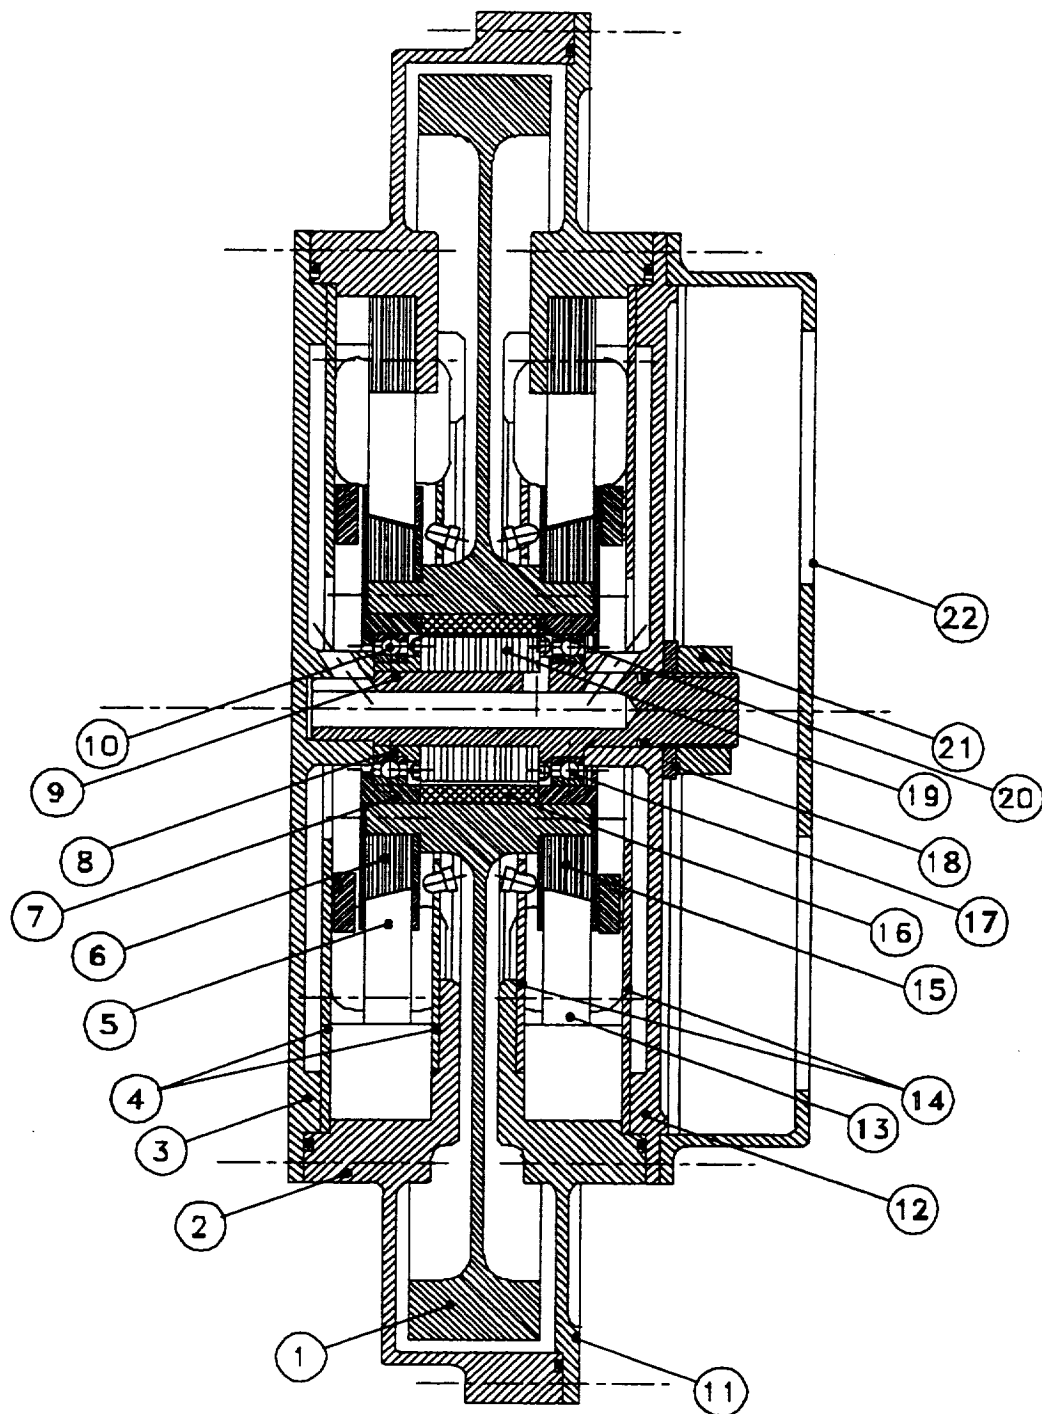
Reaction wheel section drawing (not to scale) with part numbers.
